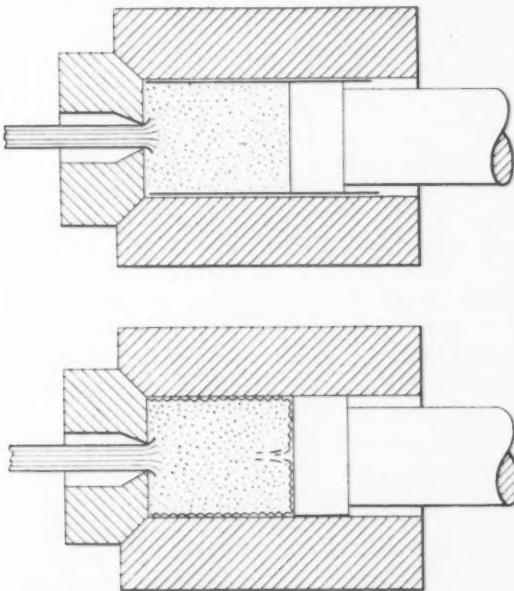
Influence of follower pad on extrusion. (Above) loose fitting pad shears off oxide skin. (Below) close fitting pad buckles and extrudes oxide.
